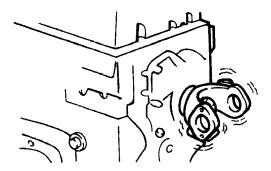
Check For Excessive Movement of End Yokes, Axle Input or Output Shafts
